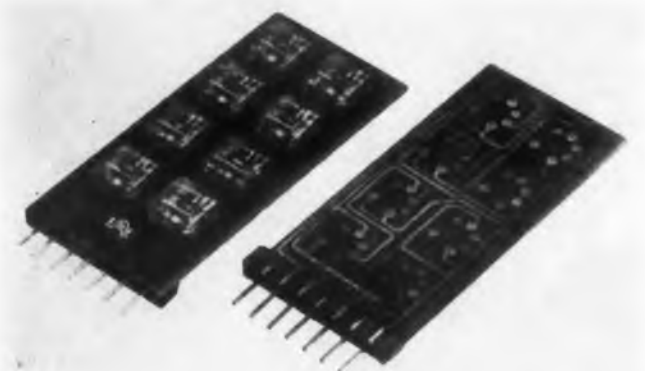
Prototype receiver being built by RCA using micromodules has shielding compartments for stage isolation; interconnection is accomplished by means of a printed board, plated-through holes, and solder joints. Dimensions are 2-5/16 x 7/8 x 23/32-in., without batteries. Stacking of wafers, end-to-end, is also being considered because of the isolation provided.
